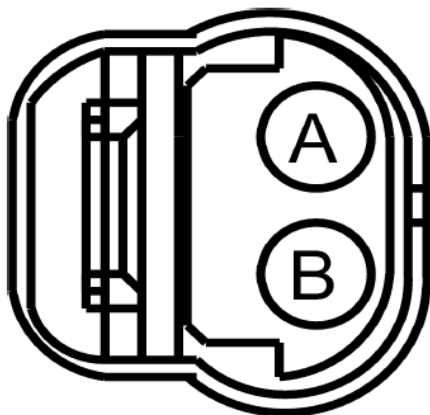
A/C Clutch Field Coil Connector End View (C100)
